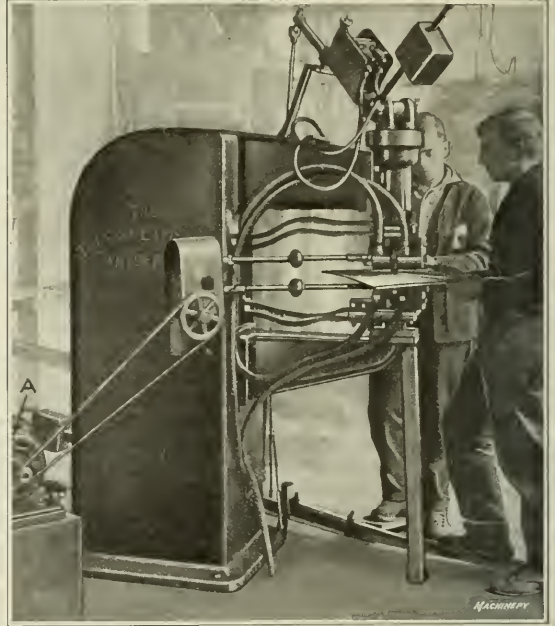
Toledo Spot Welder especially fitted up for seam-welding
